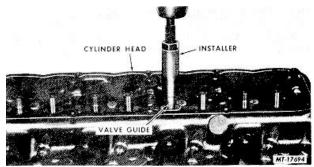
Installing Valve Guides Using SE-1943 Installer
